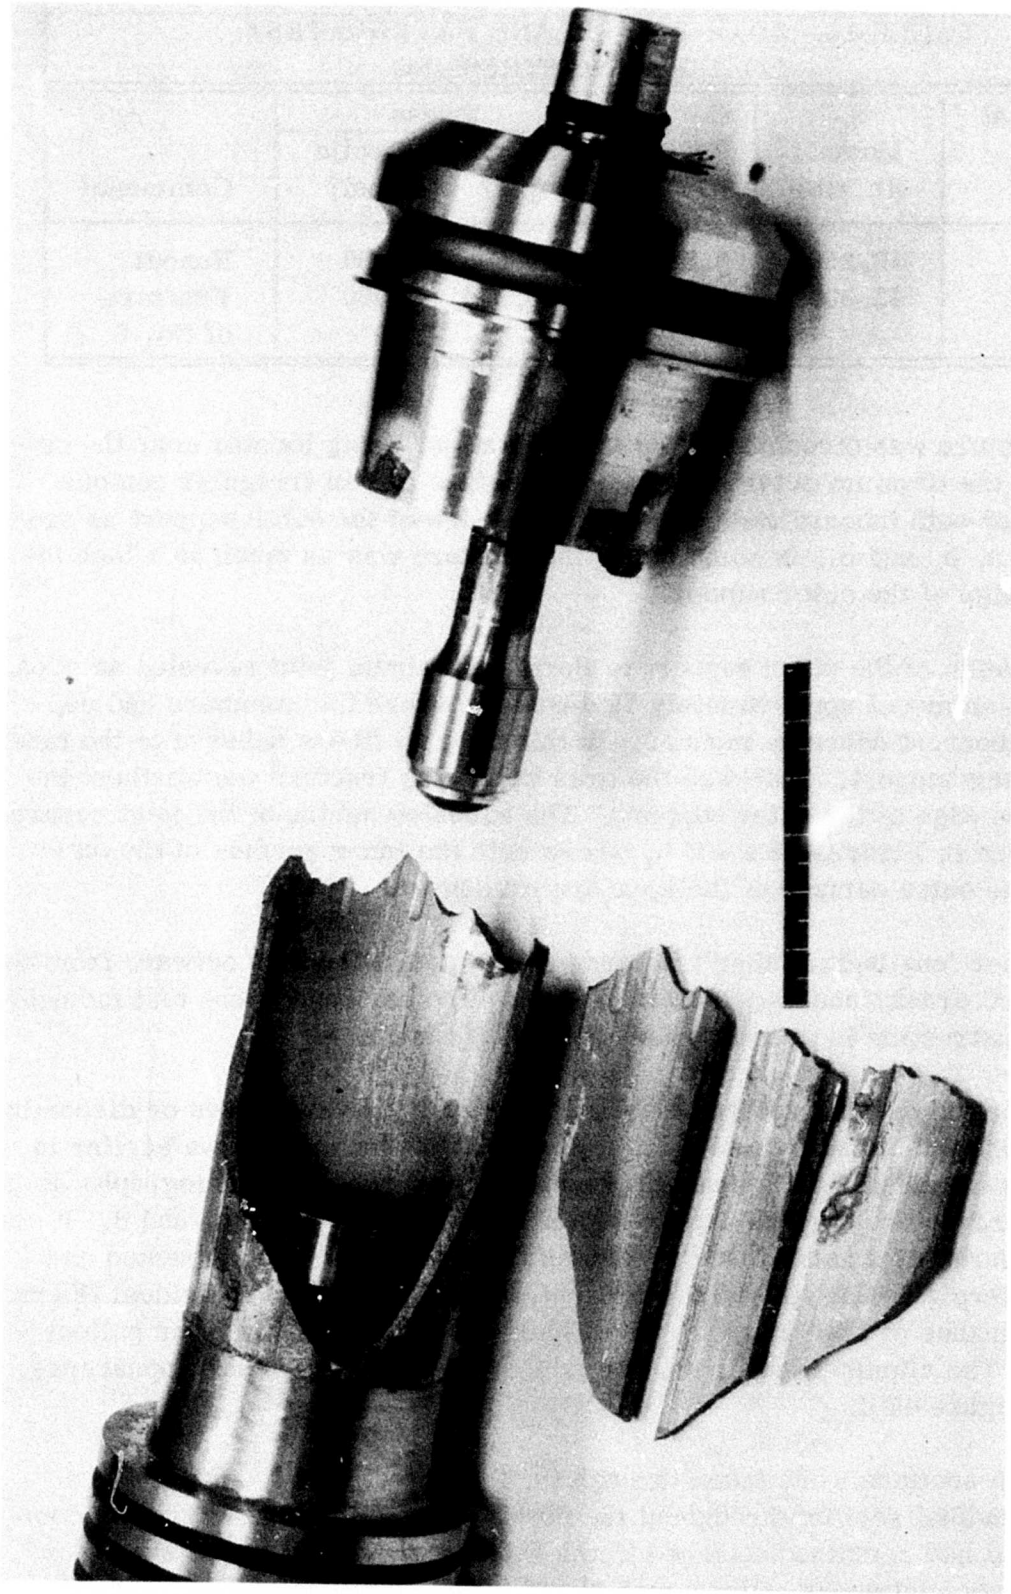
OVERALL EXPLODED VIEW OF SPAR NUMBER 5
